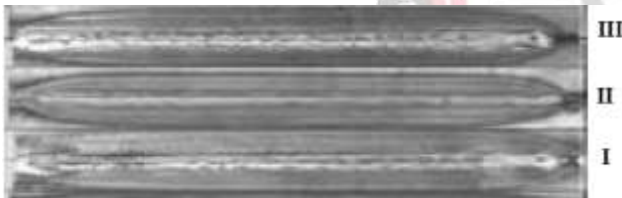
Shows the beads formed on steel plate with TIG welding process.
